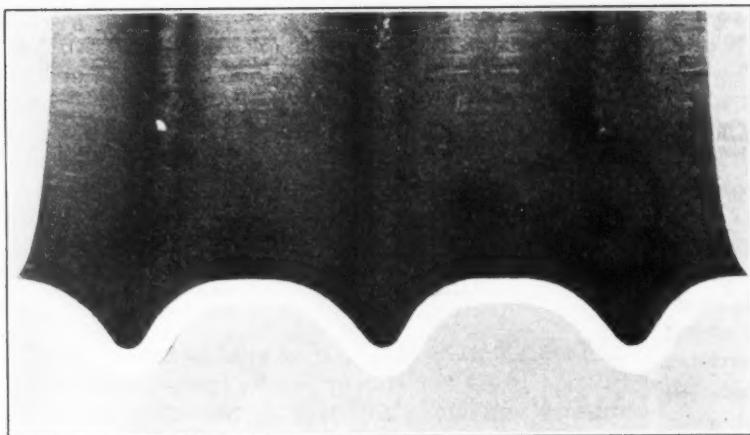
Longitudinal section showing a profile of typical corrugations in series A piping
